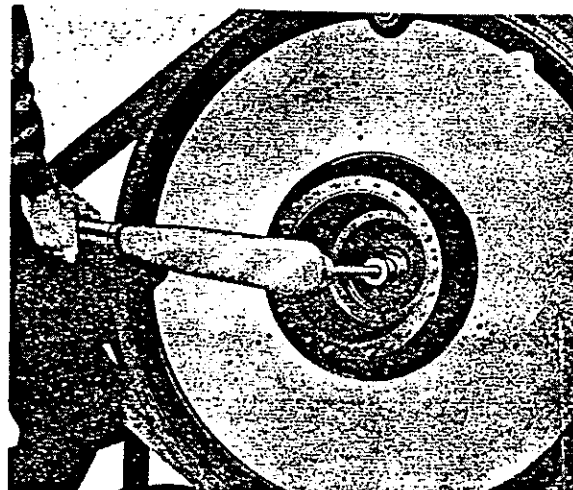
Breaking Torque on Compressor Front Shaft Spanner Nut
